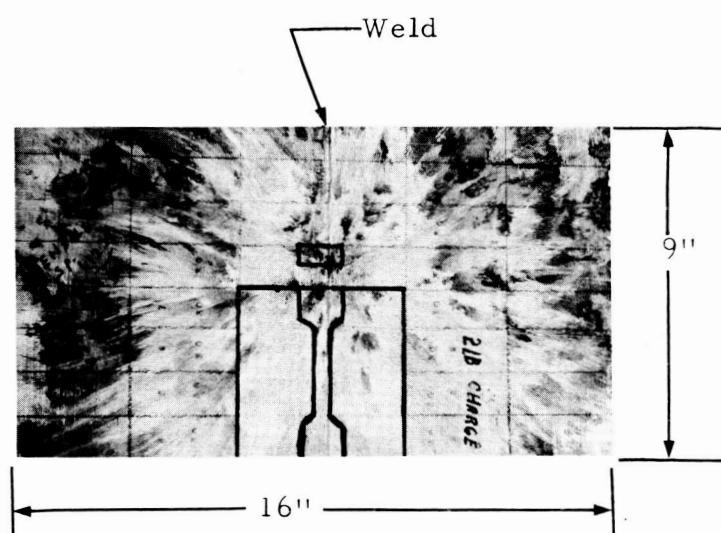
APPEARANCE OF 3/4" THICK 2219-T87 WELDMENT AFTER EXPLOSION IMPACT LOADING WITH A 2-POUND CHARGE OF PENTOLITE (PLATE NO. 30).
